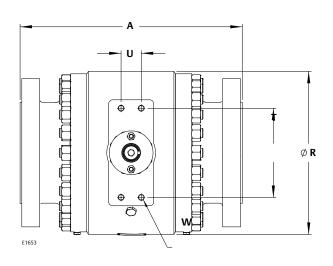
NPS 24 CL600 Packing Box Housing Mounting Pad Dimensions (see table 2)
